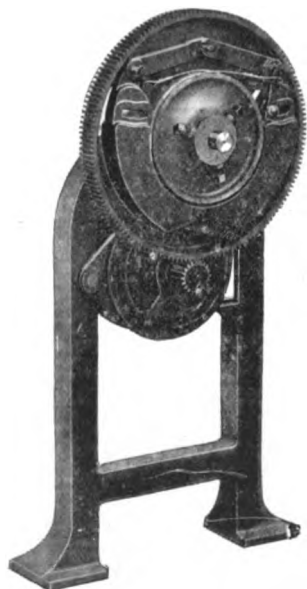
GEAR DRIVE WITH FRICTIONAL COUPLING FOR LOOM.
